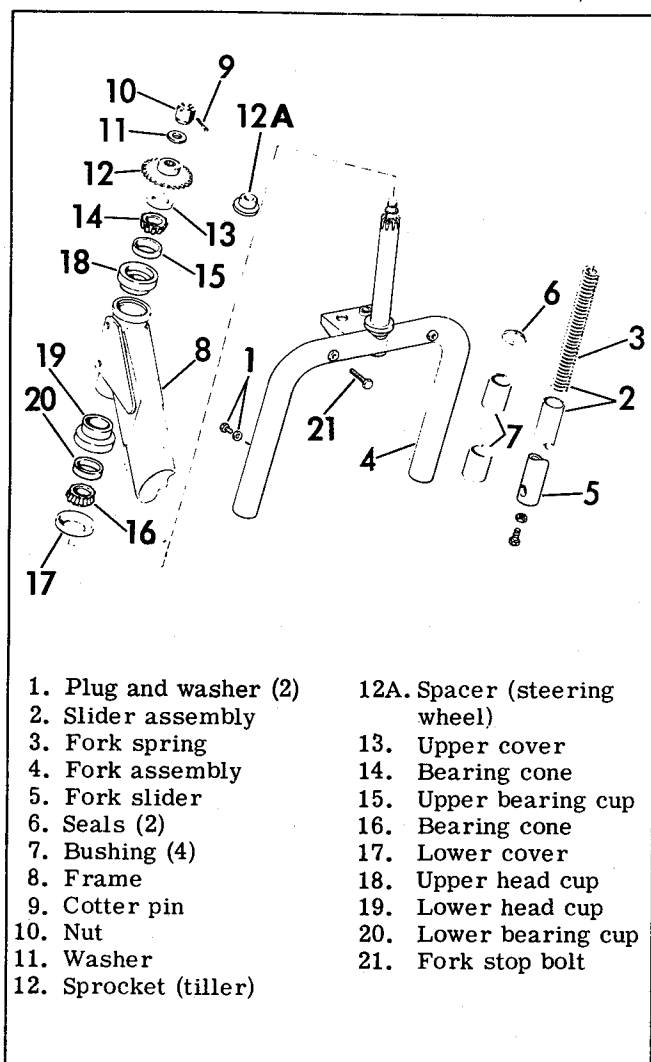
Front Fork, 1970 and Later - Exploded View
